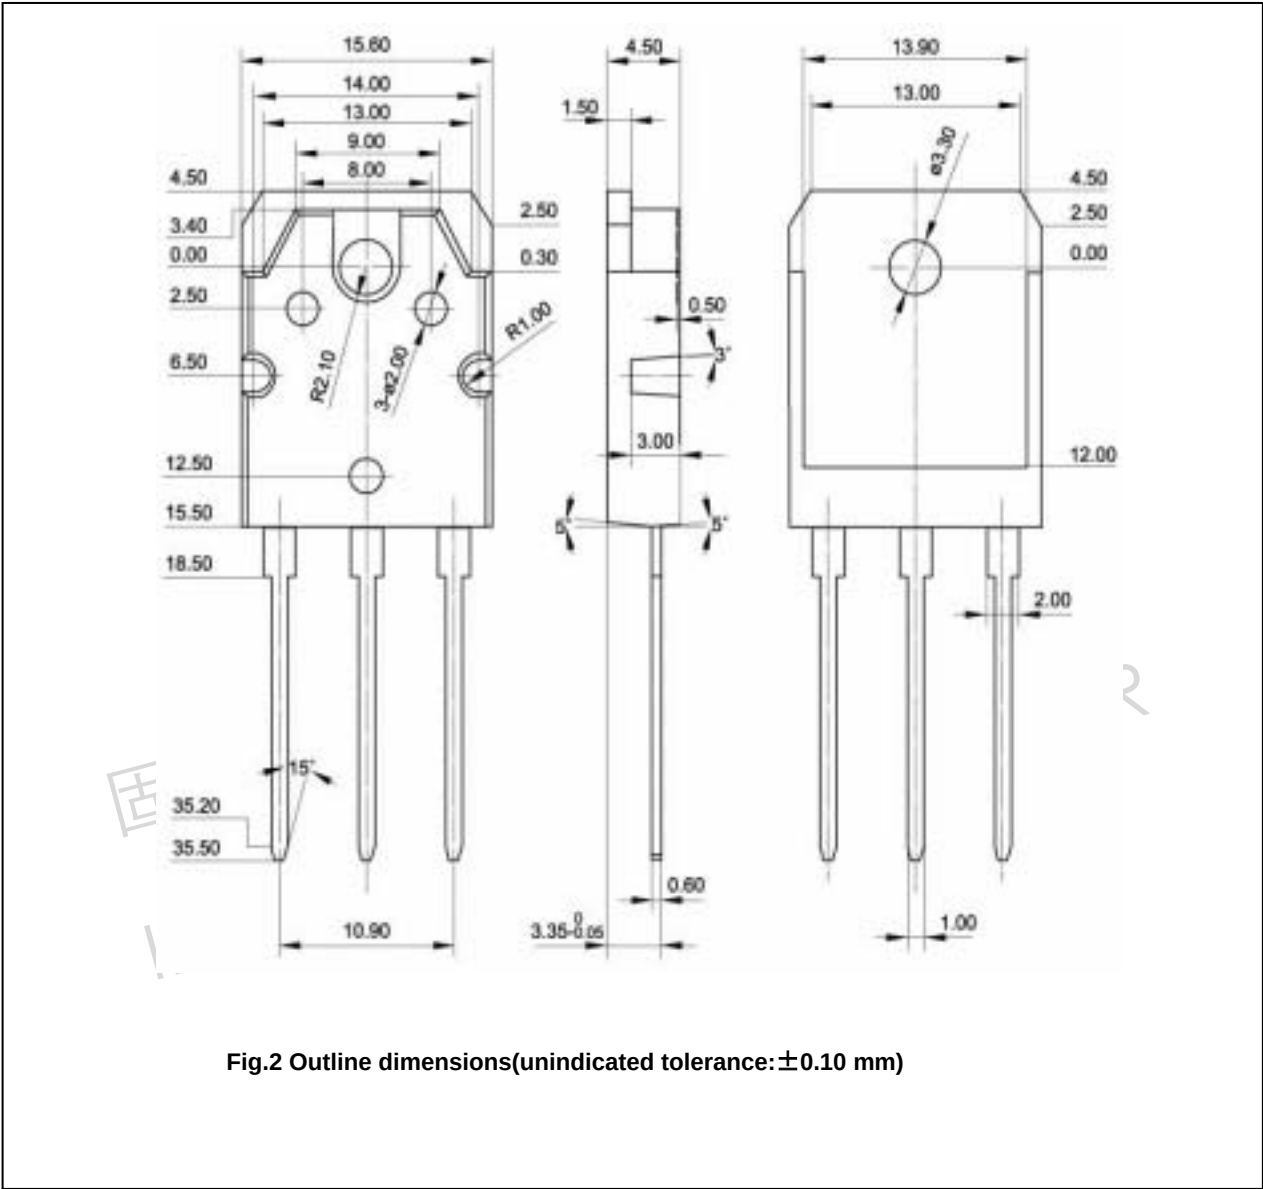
Outline dimensions(unindicated tolerance:±0.10 mm)
